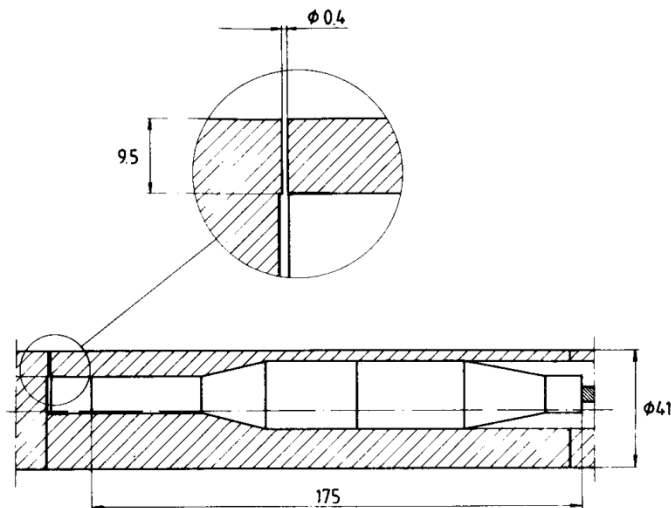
Test tube with microphone in pinhole arrangement. Dimensions in mm.
